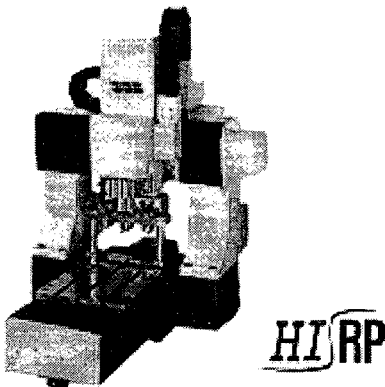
Compact sized high-speed machining machine (HisRP M/C)
